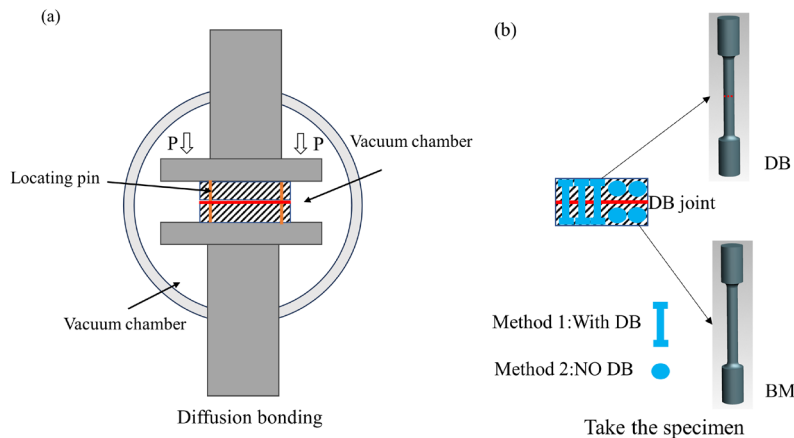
(a) Billet diffusion welding diagram and (b) specimen preparation diagram.
